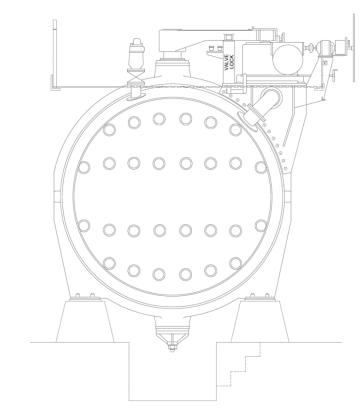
Elevation view of vertical penstock butterfly valve with horizontal sector gear with electric motor driven operator with manual handle installed
